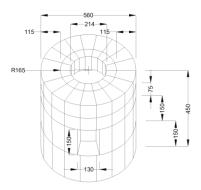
Isometric of modified furnace with relevant dimensions in mm
